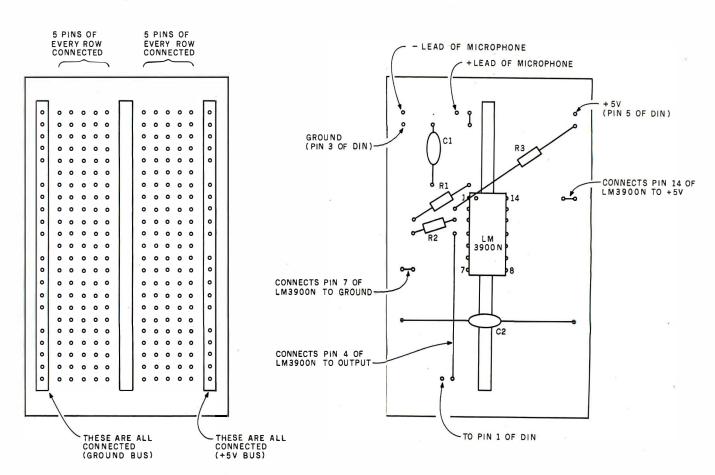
The project uses an inexpensive prototype circuit board, which allows the six components to be connected without soldering or wire-wrapping.
